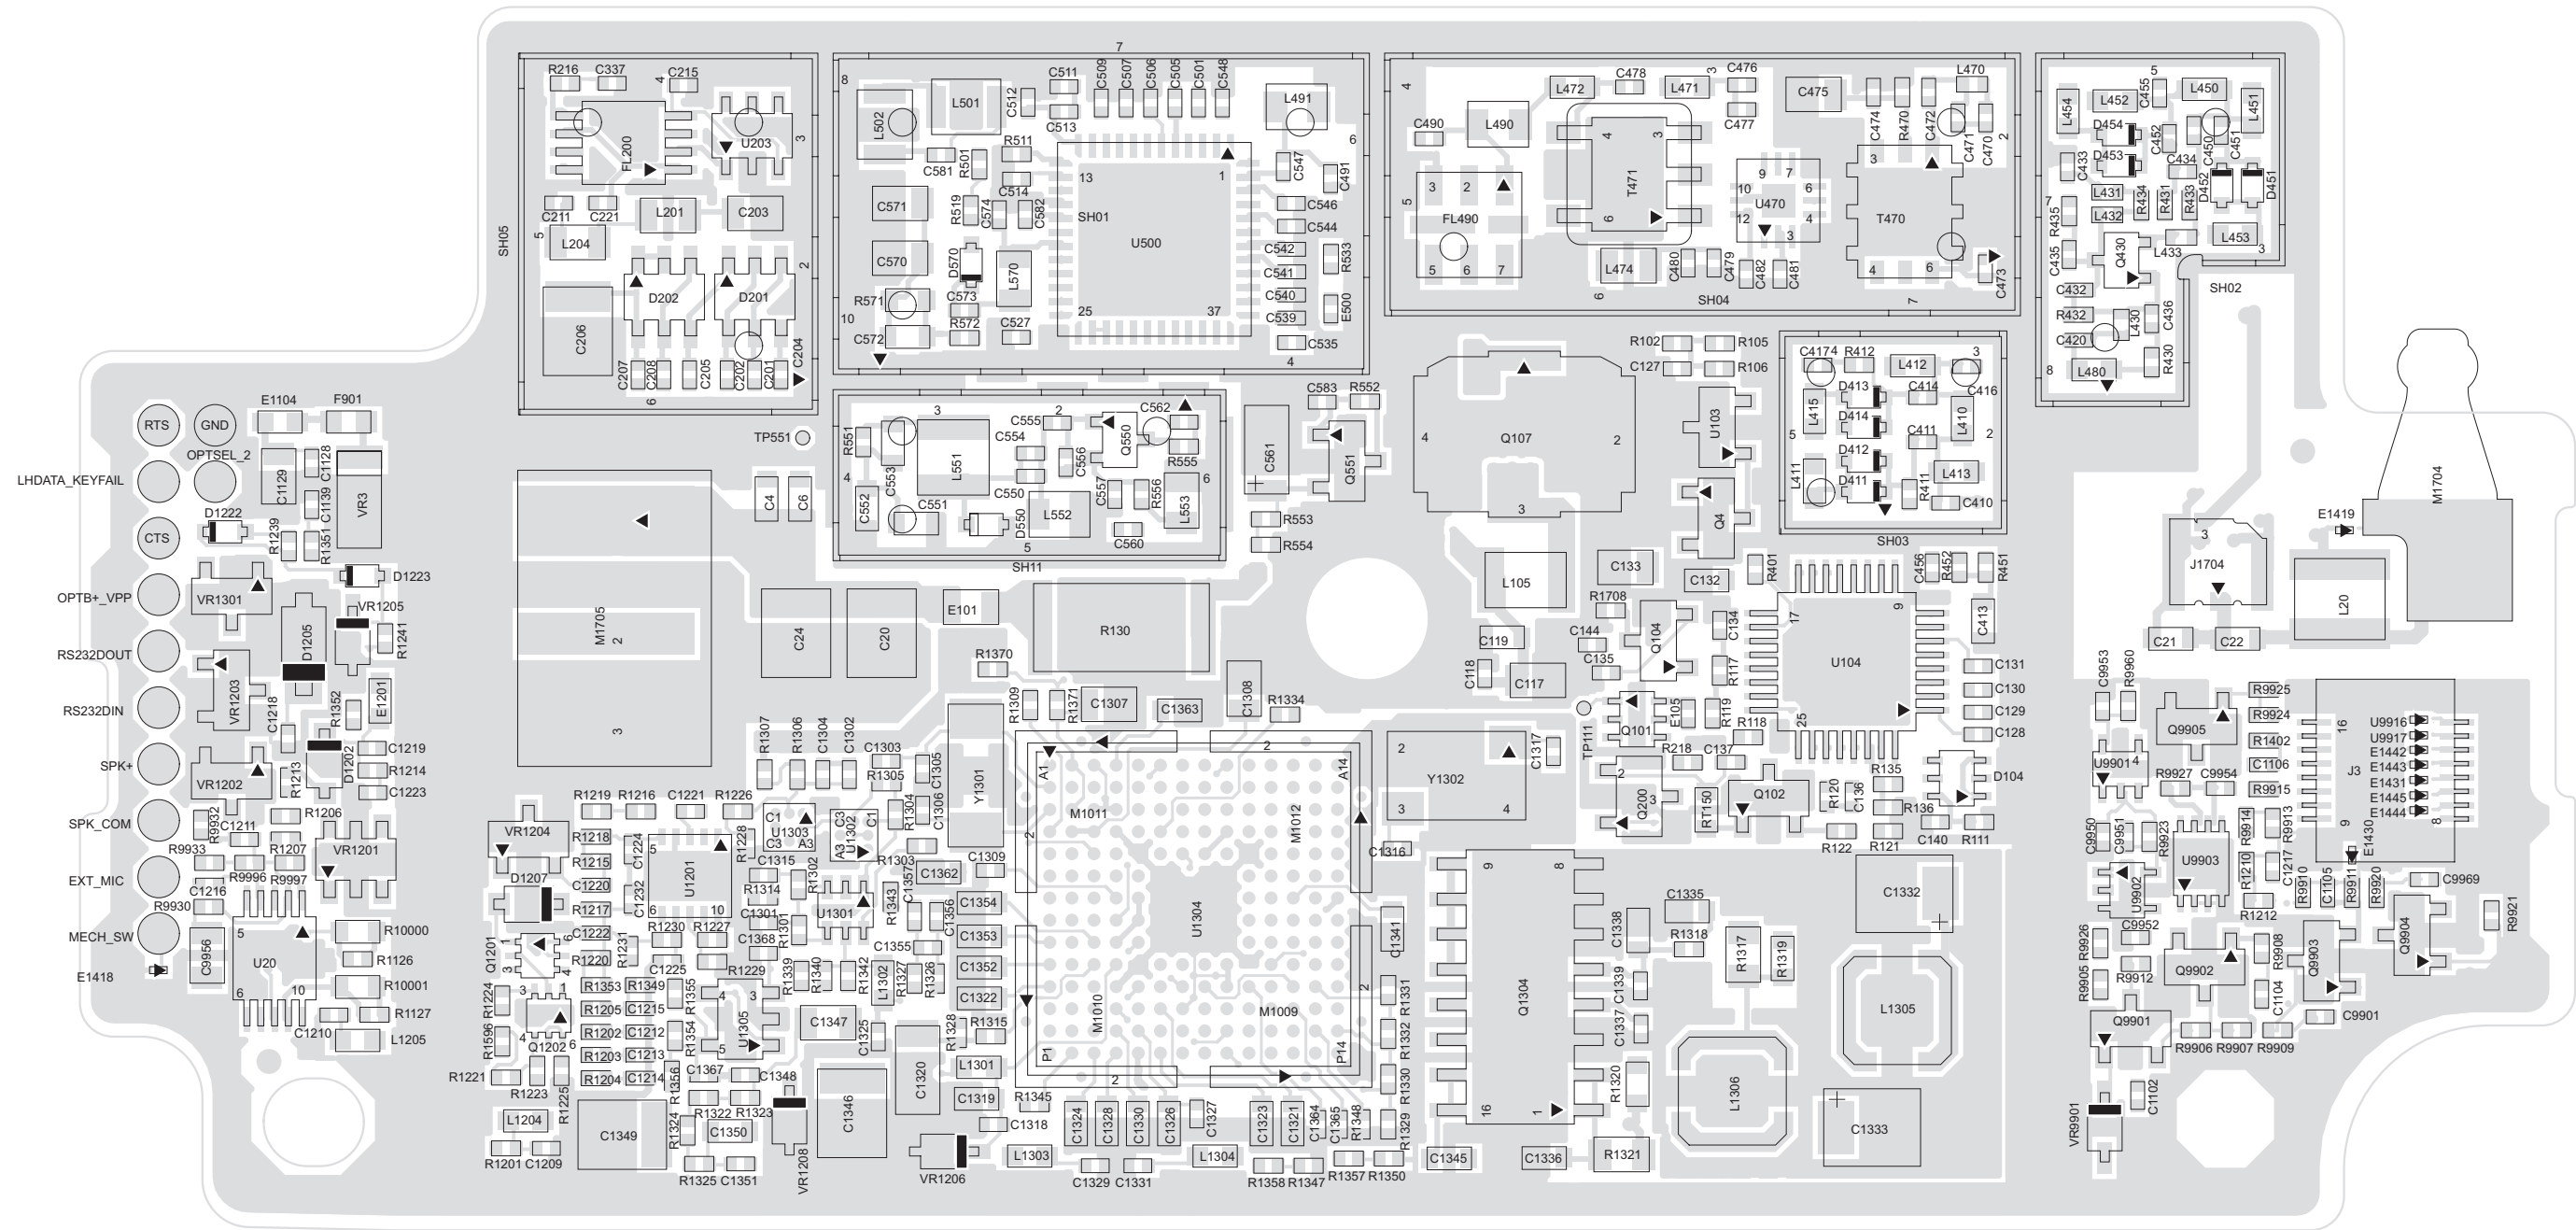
Main Board Layout (NUD7115B) – Side 2
